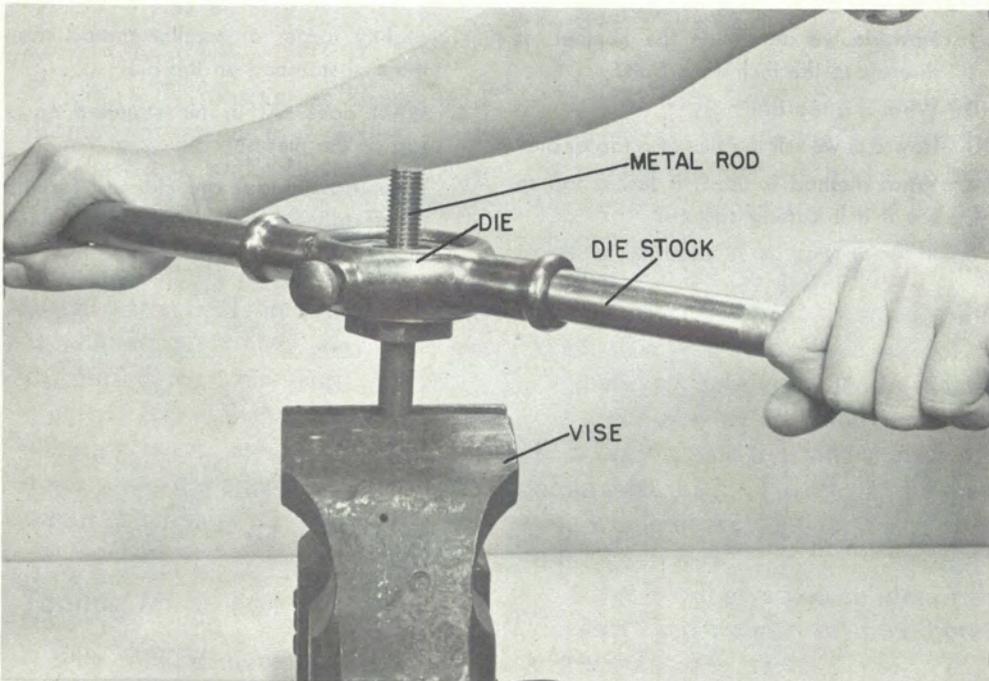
Cutting Threads With a Die. After a thread has been cut, it should be tested by being screwed into the internal thread with which it is to be used. If it fits too tightly, adjust the die to cut a smaller thread. It is always best to cut a thread that is too large. Then adjust the die for a light finishing cut of the thread for a perfect fit.
